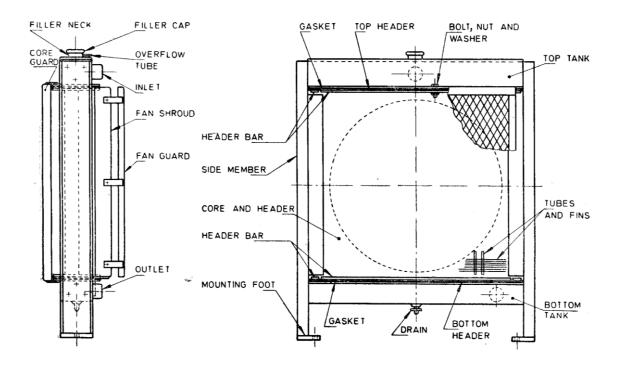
CAST OR FABRICATED RADIATOR ONE PIECE CORE
